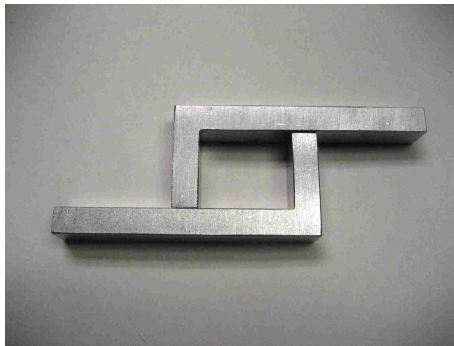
Picture of milled L-Clamp to be used as casing for sensor fabrication
